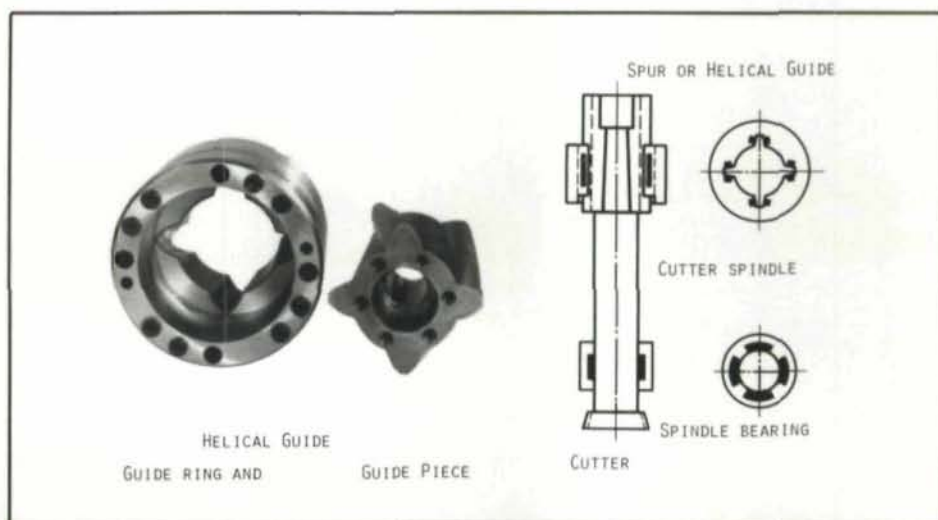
Hydrostatic lubrication of cutter spindle guide and lower bearing
